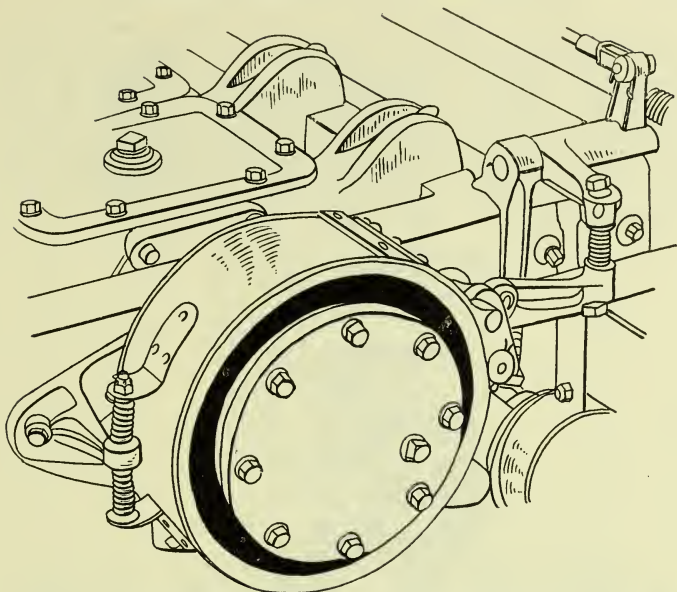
BRAKE EMPLOYED ON A FOUR-WHEEL-DRIVE TRUCK
